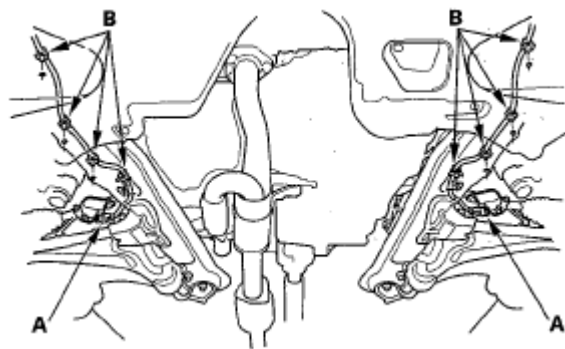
Identifying Front Suspension Stroke Sensor Connectors And Harness Clamps
